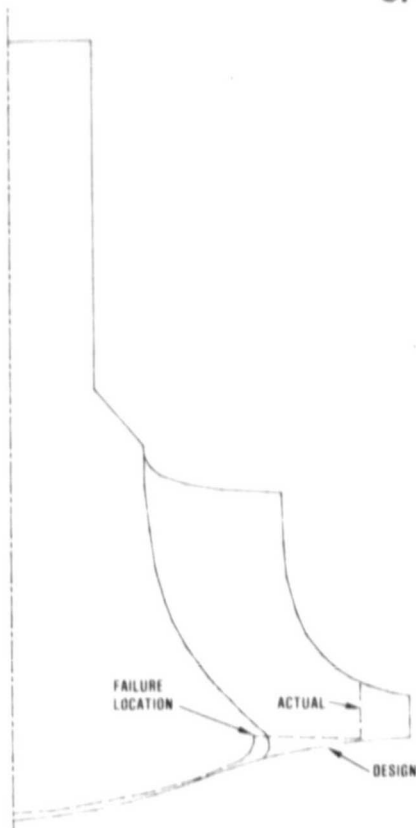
Schematic Representation of Machining Notch Believed to Cause Blade Failures of Bladed Rotor S/N 5.
